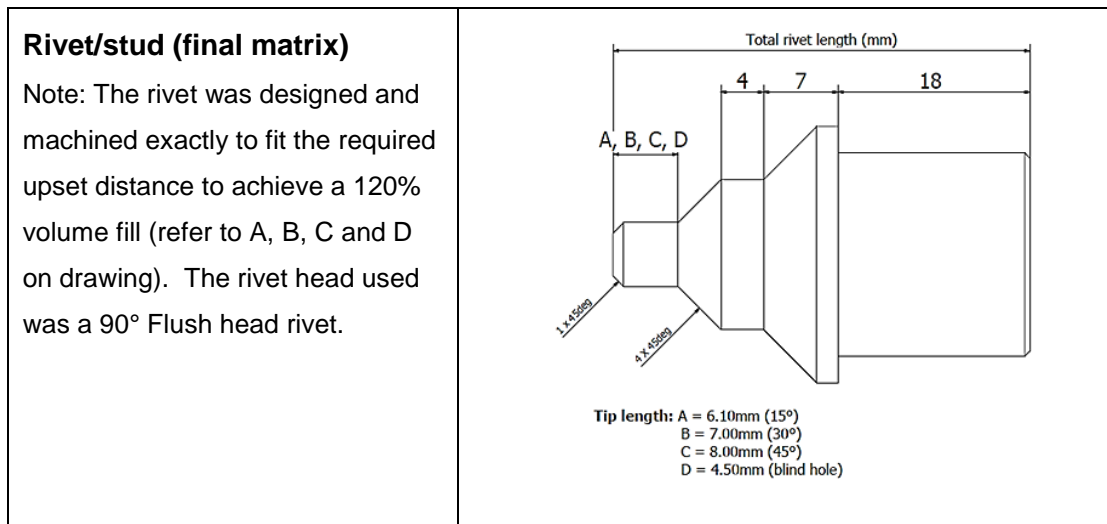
Rivet design for final matrix using the Weldcore 3 platform
